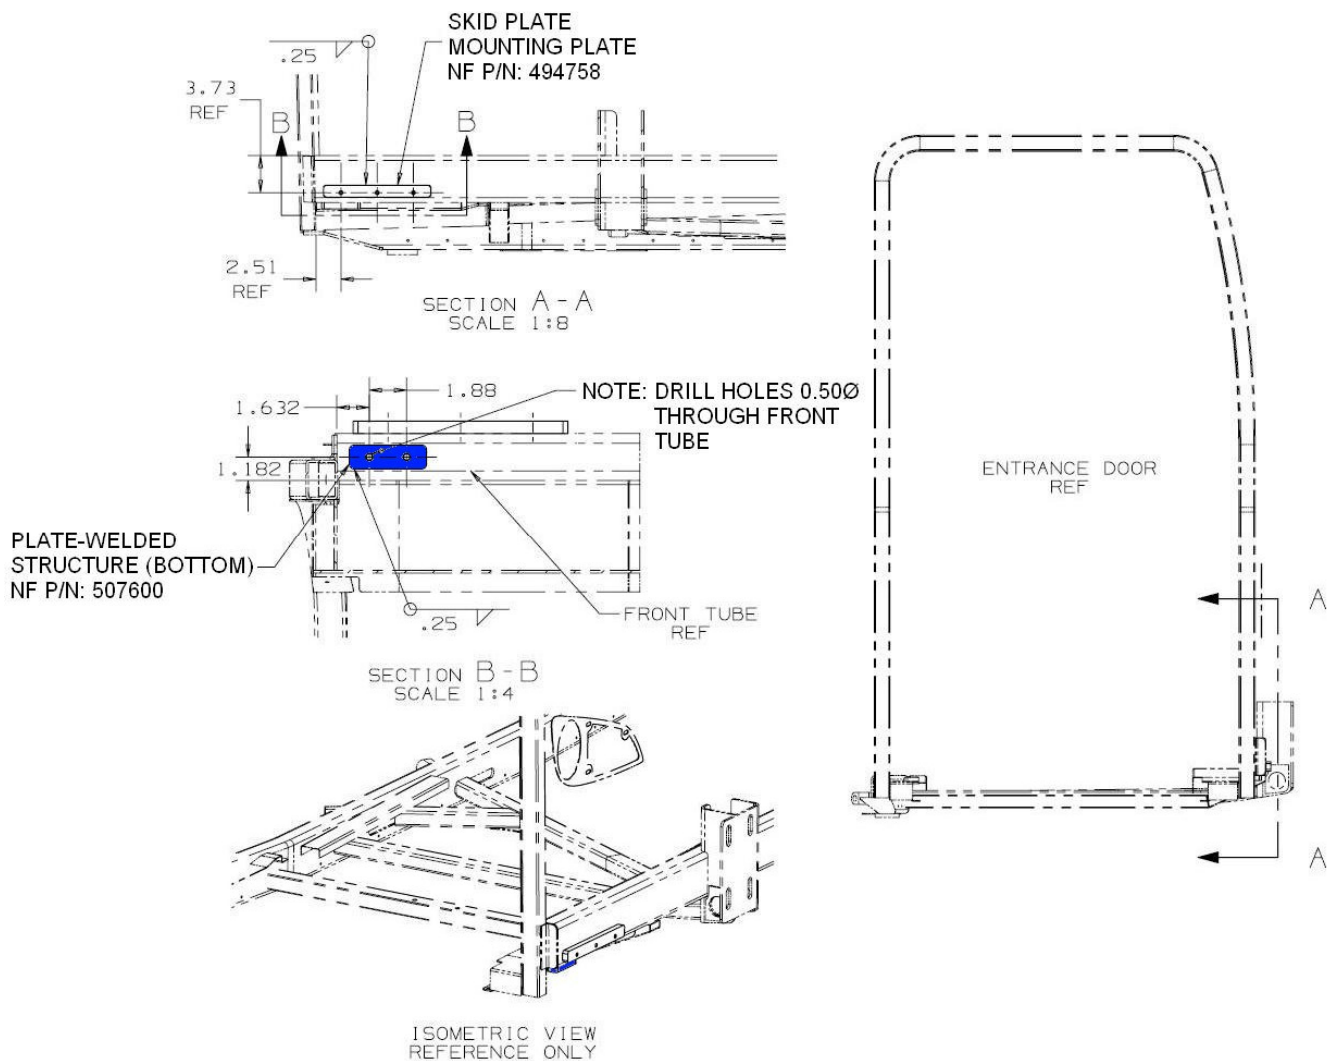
SKID PLATE WELDED MOUNTING PLATE INSTALLATION REFERENCE
